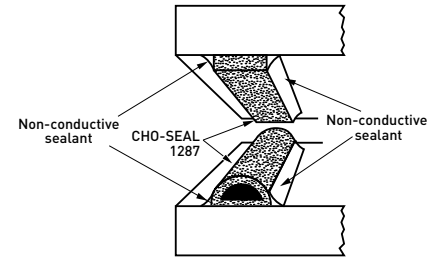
"Seal-to-seal" design incorporating CHO-SEAL® 1287 conductive silver-aluminum fluorosilicone gaskets on both mating flange surfaces. Gaskets are bonded and edge sealed to prevent moisture from entering the gasket/flange area.
